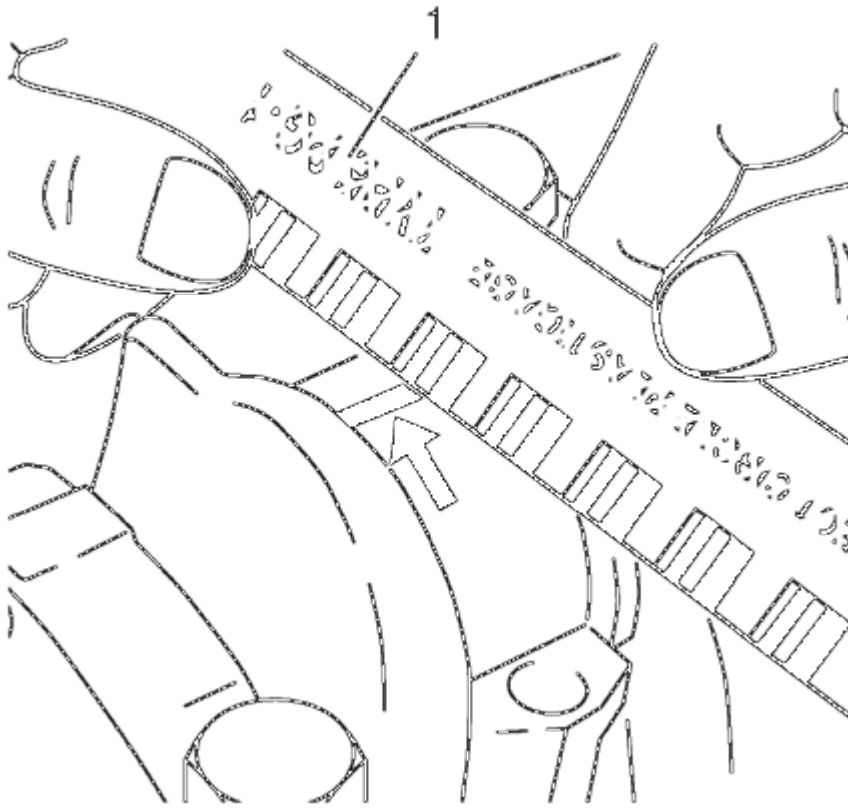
Measuring Connecting Rod Bearing Play Using Measuring Scale
